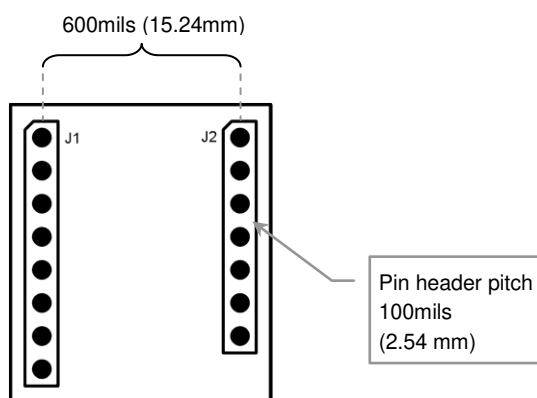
SCA8X0/21X0/3100 PWB Bottom View and Mechanical Dimensions.
